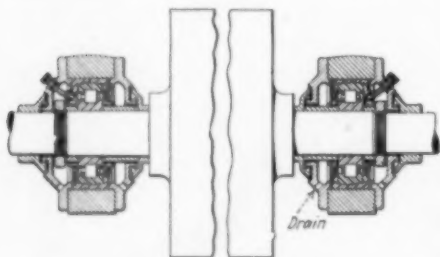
Moisture-Proof Bearing Applied to Paper Machine
